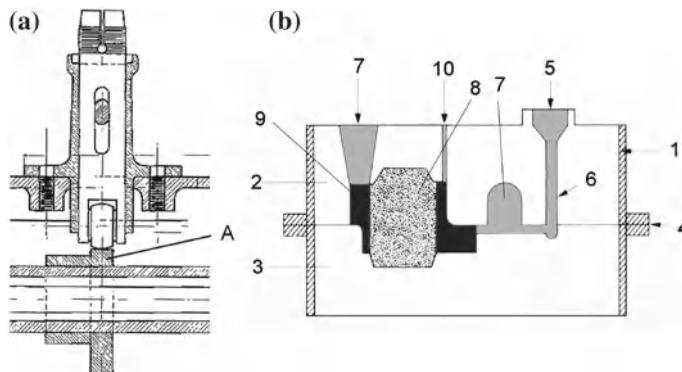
The cam A in sketch a is taken as an example to describe a typical casting mould in b. The moulded piece 9, i.e. the cam, needs a core 8, to obtain the internal hollow. The mould is contained in a flask 1 and is divided in two parts, the cope 2 and the drag 3, separated by a parting line 4, positioned following the shape of the piece. The liquid metal is poured into the pouring cup 5, through the sprue 6 and overflows through the risers 7. The cooled metal contained in elements 5, 6 and 7 must be removed from the casting
